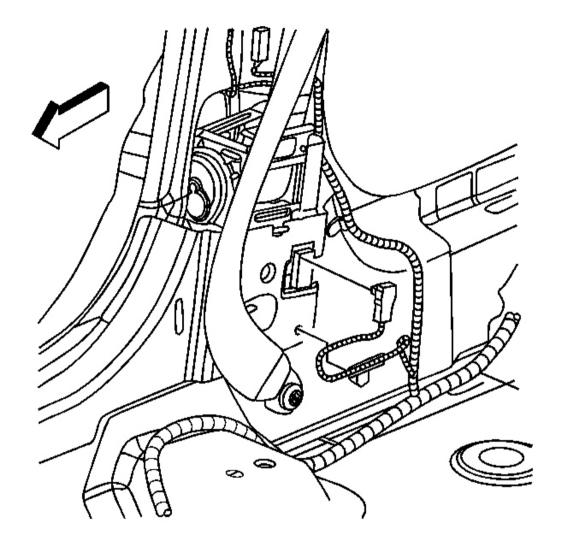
View Of Seat Belt Wiring Harness Routing Courtesy of GENERAL MOTORS CORP.
